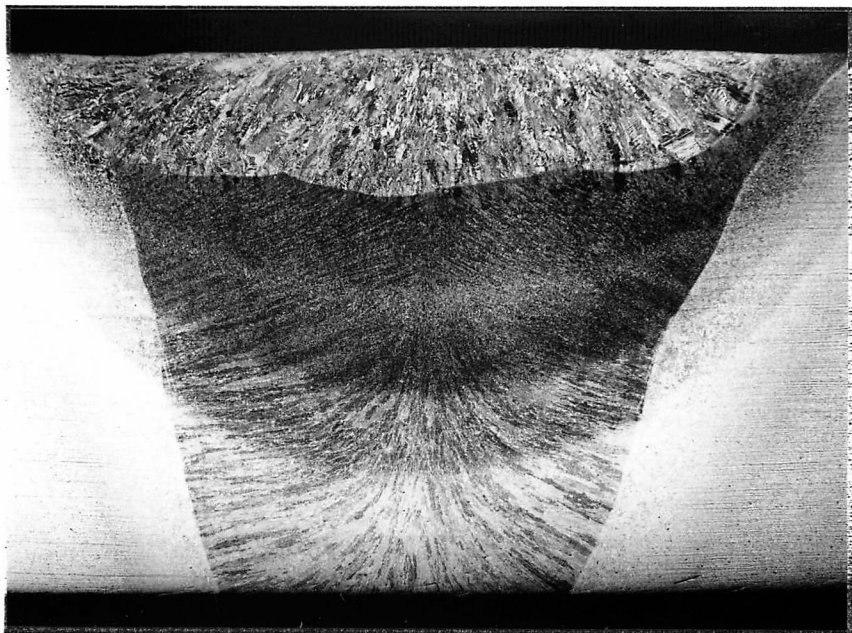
Macrostructure of T.I.G. remelted submerged arc weld deposit.
